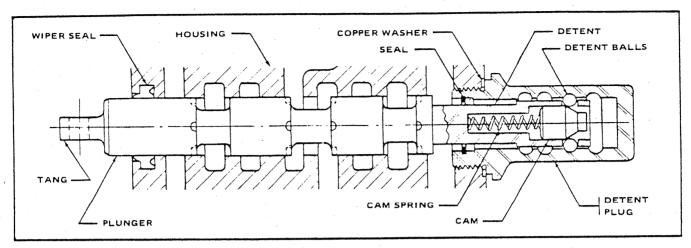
3/4" Double Acting Plunger (Axially Hydraulically Unbalanced)
